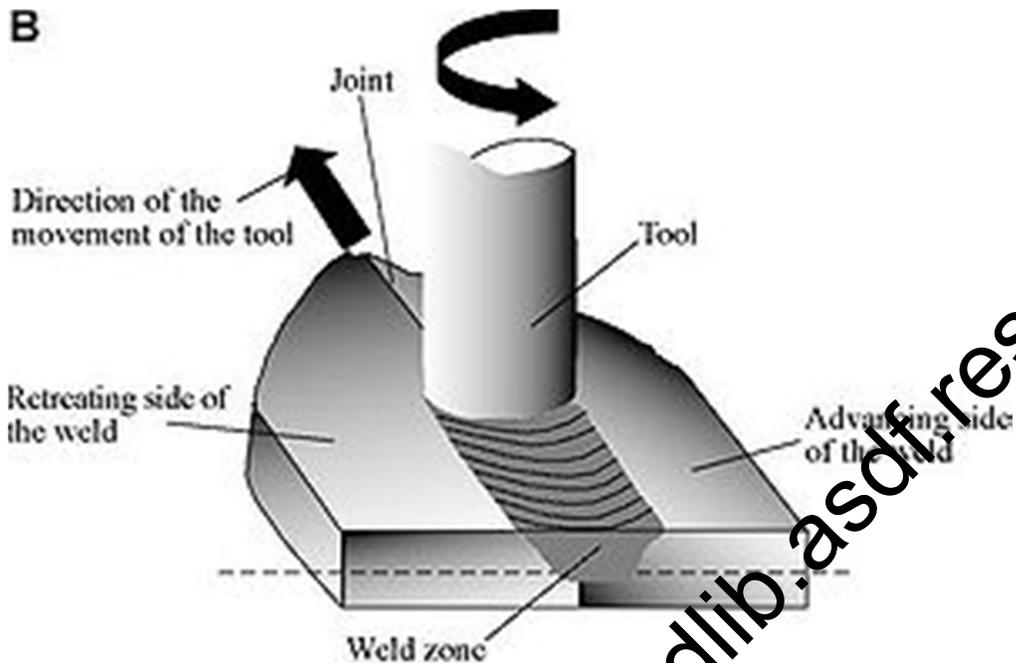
b. The progress of the tool through the joint, also showing the weld zone and the region affected by the tool shoulder.
